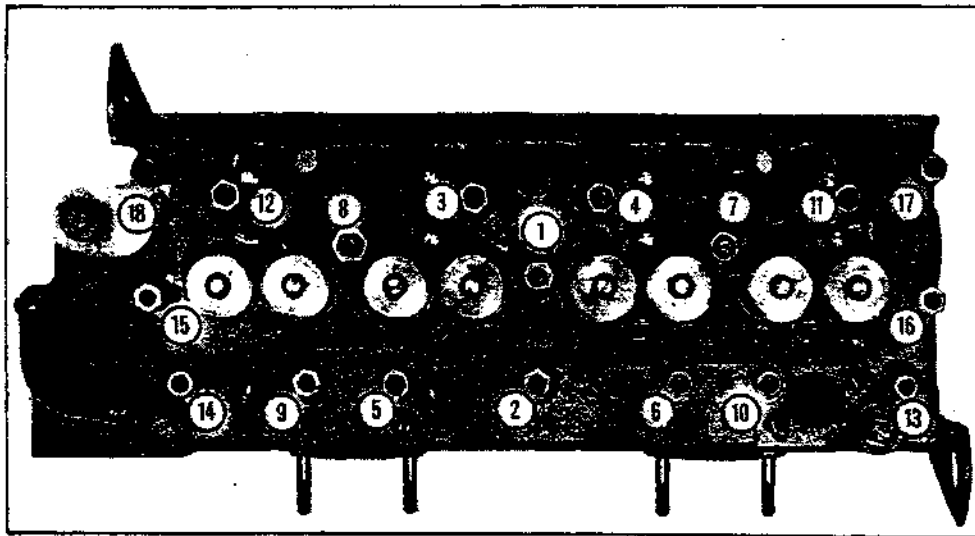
Torque Tightening Sequence for Cylinder Head Nuts
